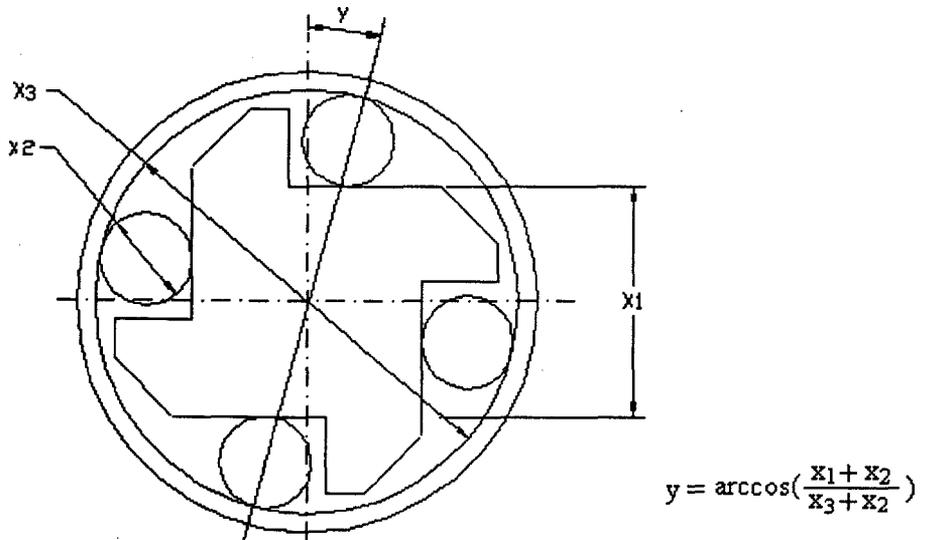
Non-Linear Tolerancing Problem
